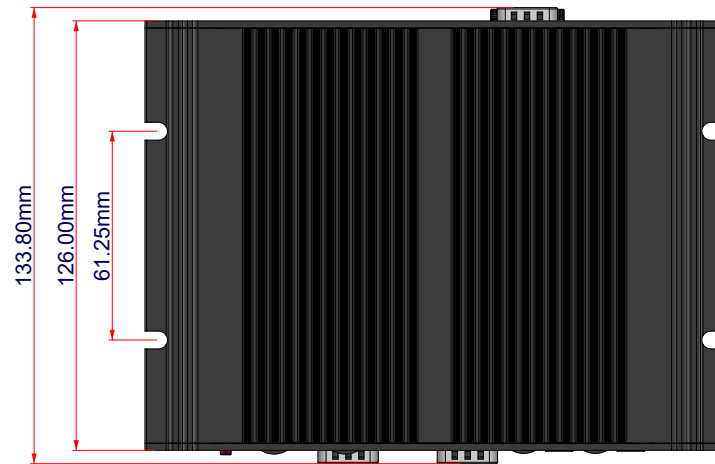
Dimensions of the VIA AMOS-3007 (top view)
